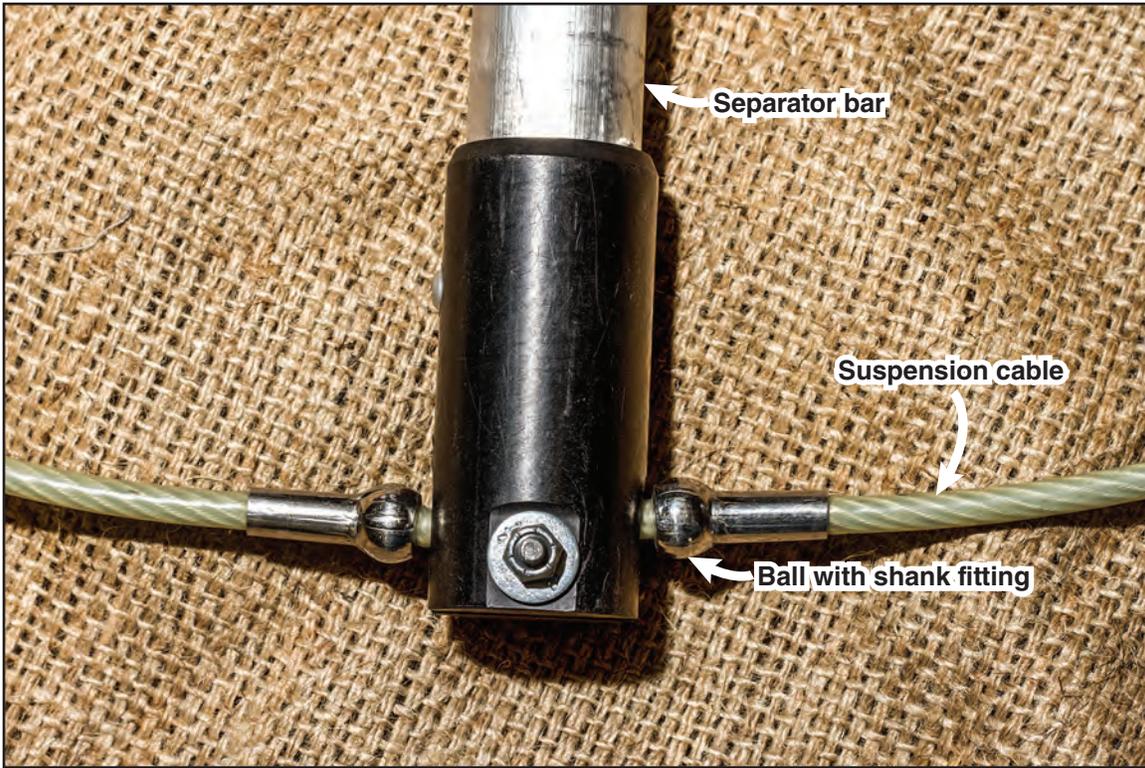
The separator bars are held in place by ball with shank fittings and a bolt at the end of the bar.
